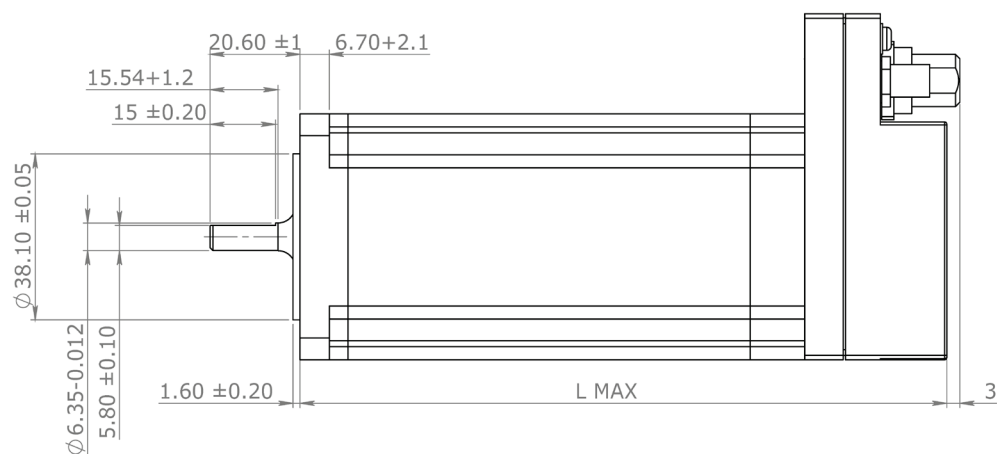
stepIM Nema 23 (IP 65) - Dimensions (mm)
